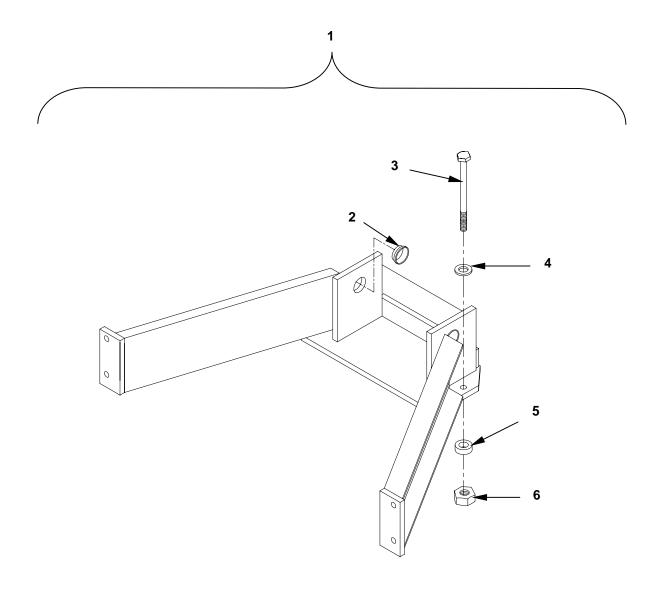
Weldment Assembly, Dual Row Airdrop Platform
